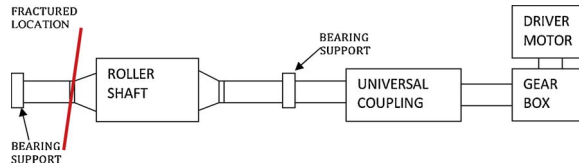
Schematic illustration of the roller shaft showing the approximate fracture location.
